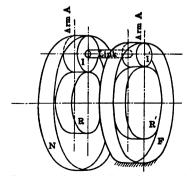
An epicyclic train consisting of two central gears, one arm carrying two planetary gears, and two internal gears, one of which is fixed.
